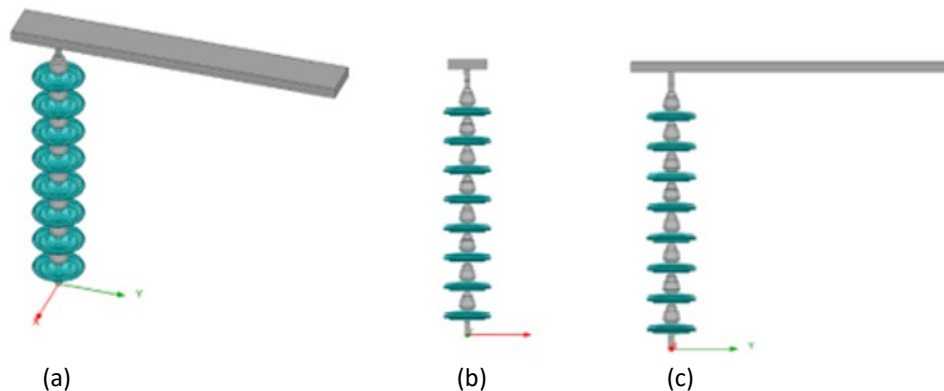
Overview of the glass insulator 3D model (a) Isometric view (b) Side view (c) Front view
